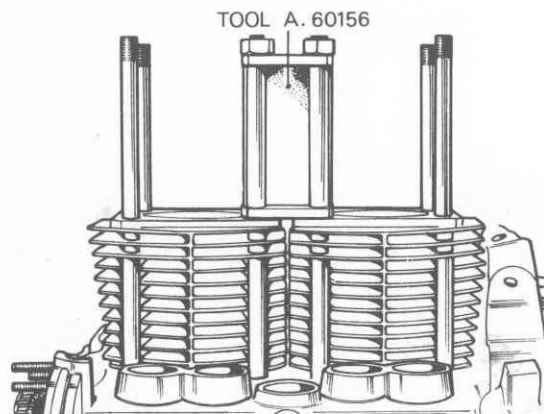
8 Using Fiat tool A.60156 on two studs to hold the cylinders in place
